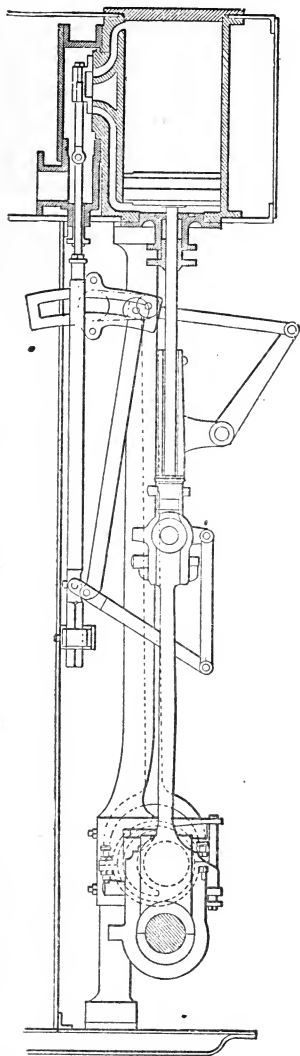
,912.—Walschaerts valve gear with return radius rod. In this arrangement the link is very near the cylinder.
